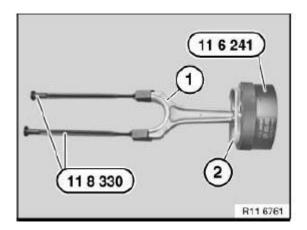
Attaching Special Tool 11 8 330 To Connecting Rod Courtesy of BMW OF NORTH AMERICA, INC.
